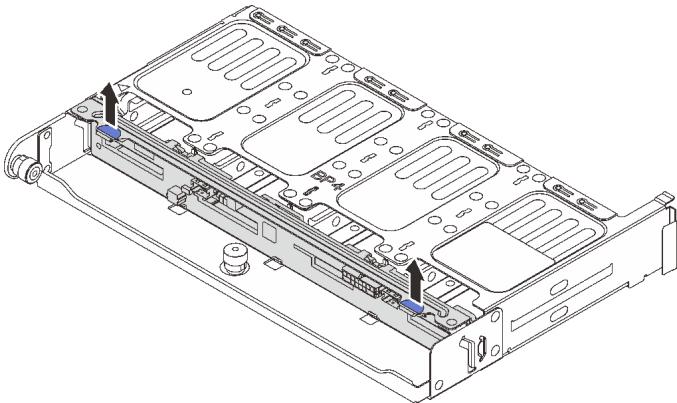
Removing the rear 8 x 2.5-inch drive backplane
